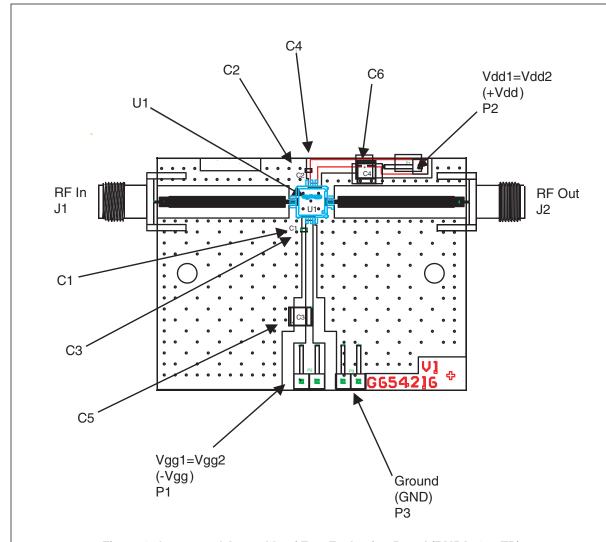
Layout and Assembly of Test Evaluation Board (RMPA2450-TB)
